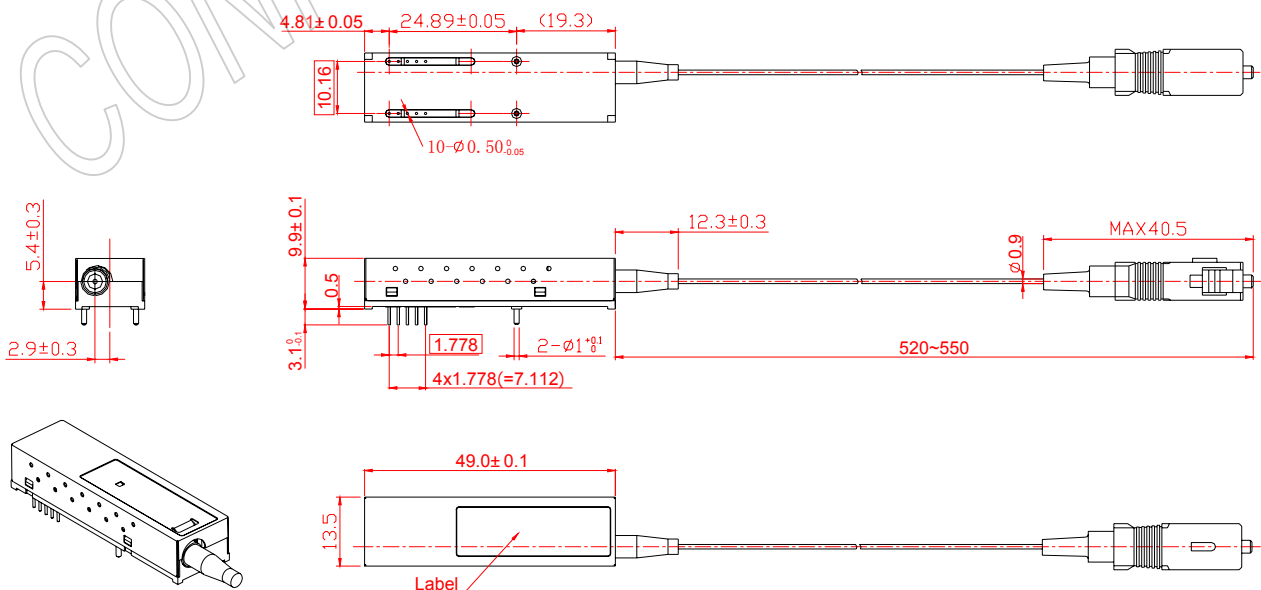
FTM-9712P(T)-F20(G) Mechanical Design Outline
